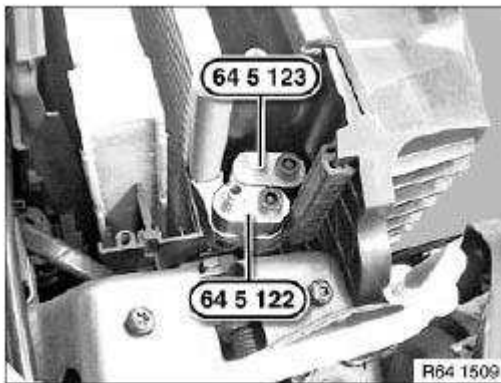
Identifying Special Tool 64 5 122 & 64 5 123
